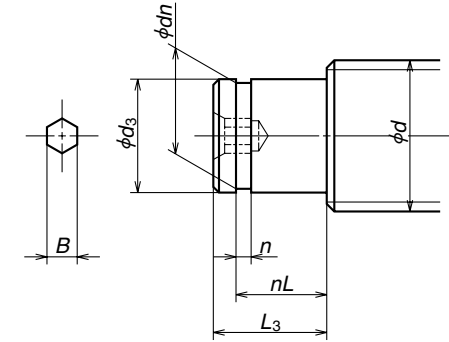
Shaft end configuration of rolled ball screw (opposite to the drive side)
